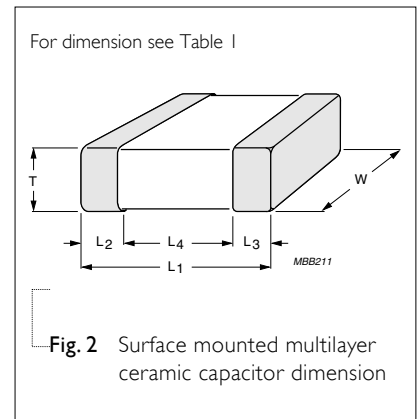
Surface mounted multilayer ceramic capacitor dimension
